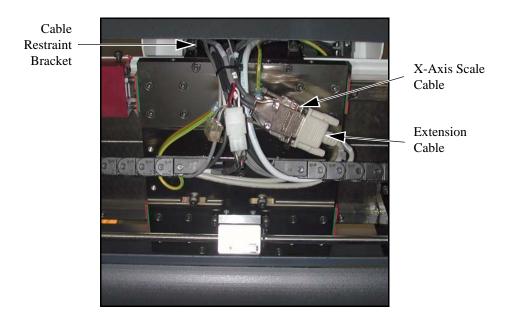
Disconnecting the X-Axis Scale Reader Head Cable from the Extension Cable
